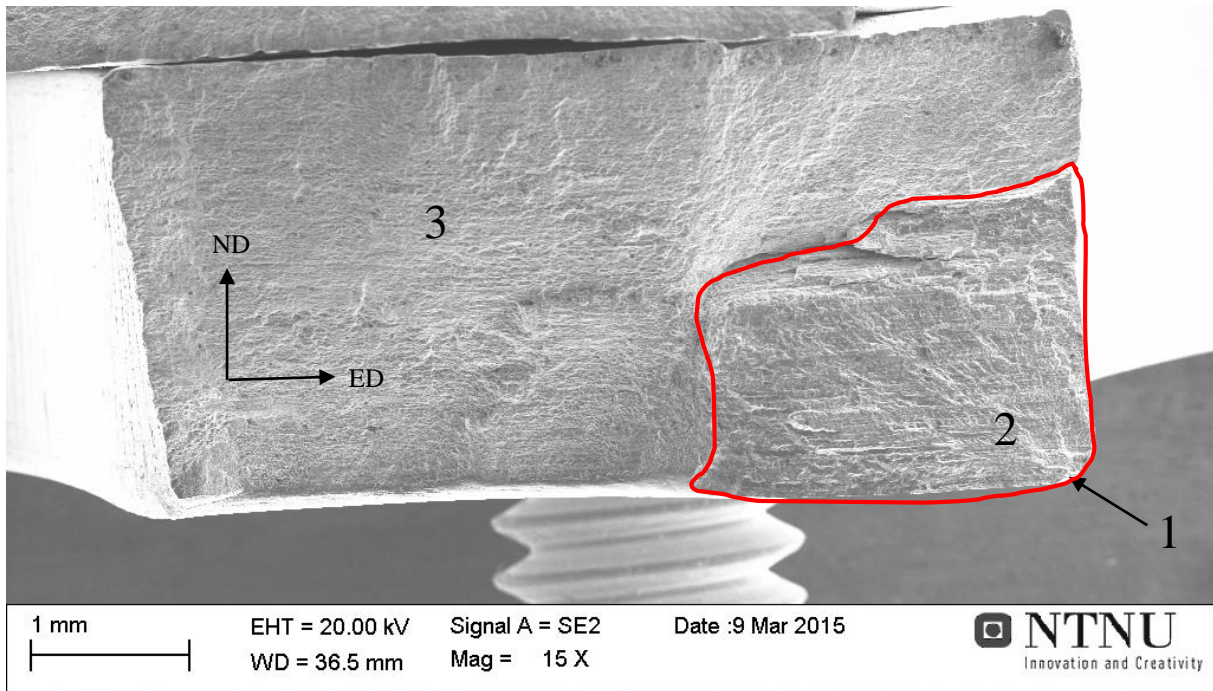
An overview of the fractured surface of AA7108 T5 with the shortest fatigue life, 15X magnification. The fatigue fractured area is enclosed by the red line.
